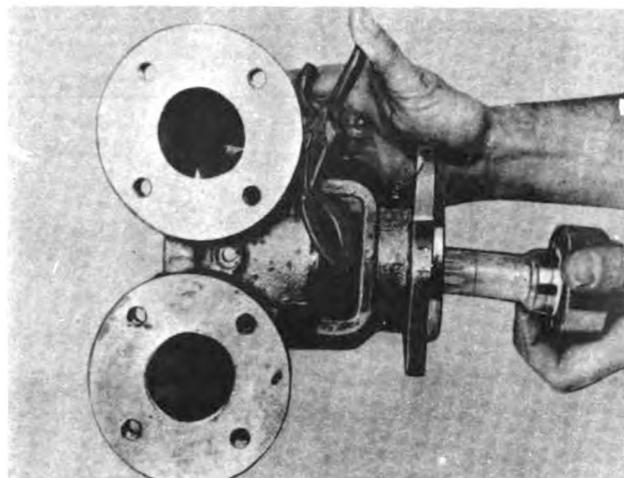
(N20806). Install The Shaft Into The Housing.
